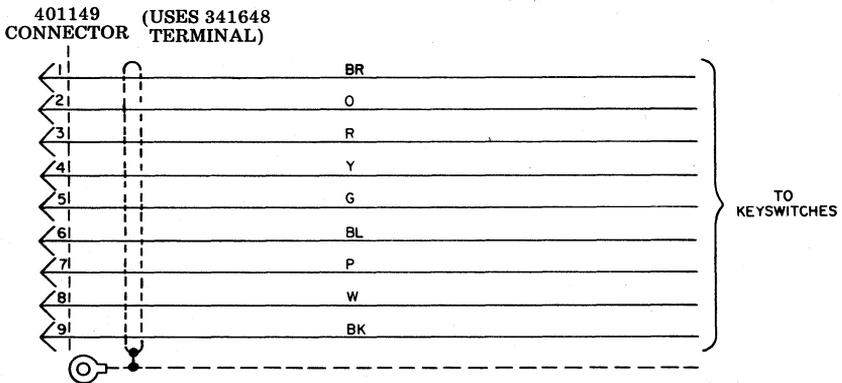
341099 Cable Assembly for the 40K001 Opcon
